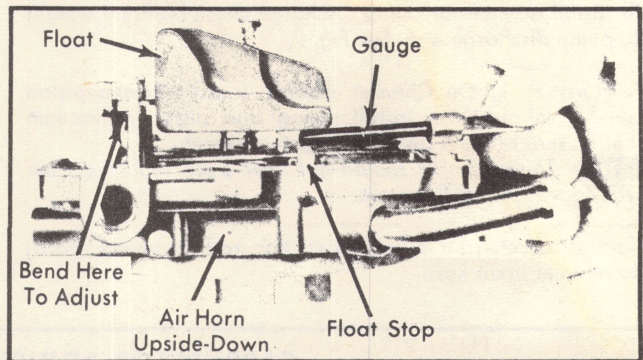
Using Gauge To Measure Float Clearance With Air Horn Inverted
